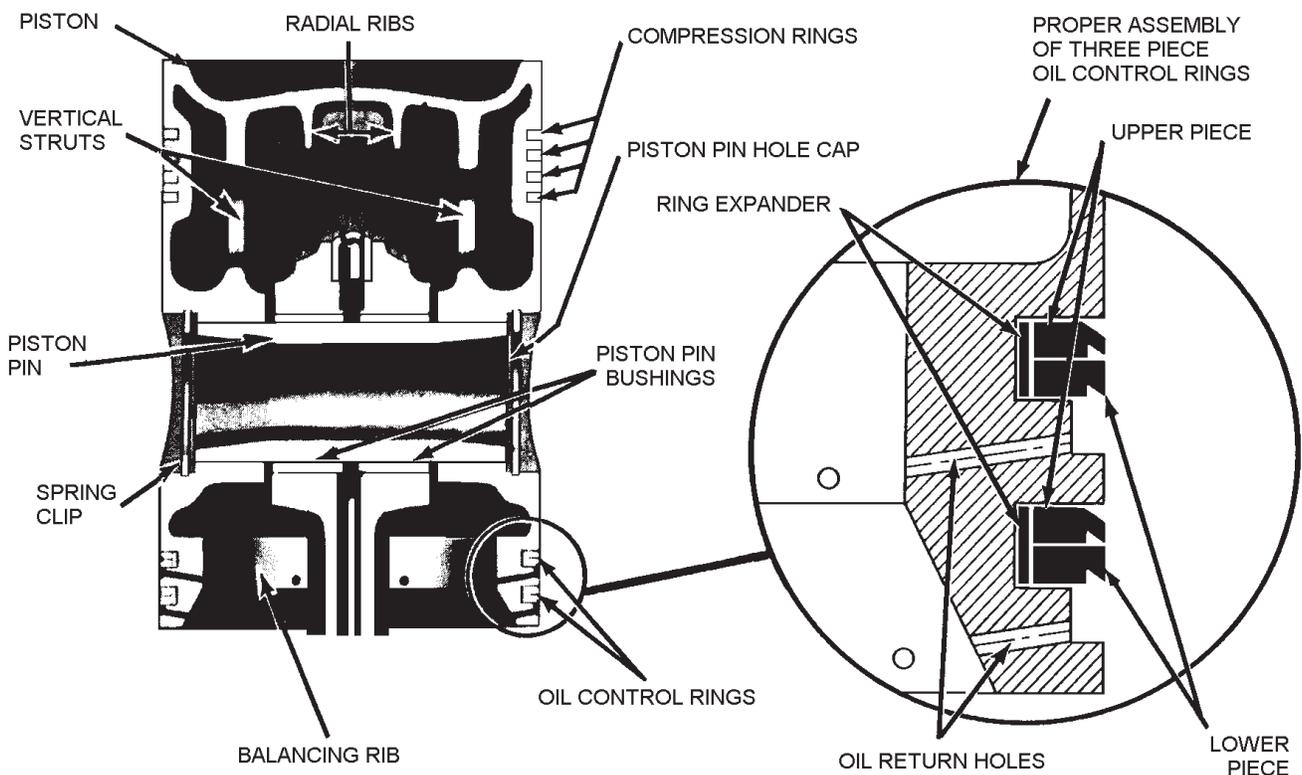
Piston assembly of General Motors series 71 diesel engine.
